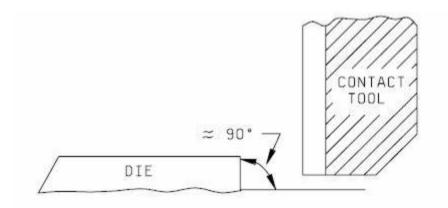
A drawing of a partial shear test setup from MIL-SPEC-88F, Method 2019.7. [67].
